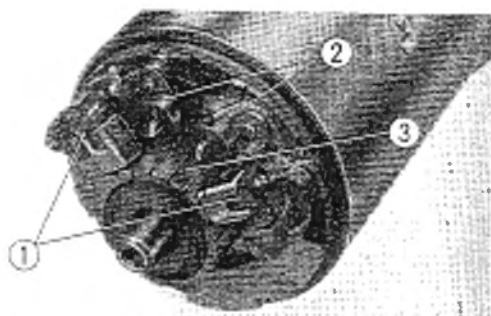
① Carbon brushes ② Brush springs ③ Commutator
